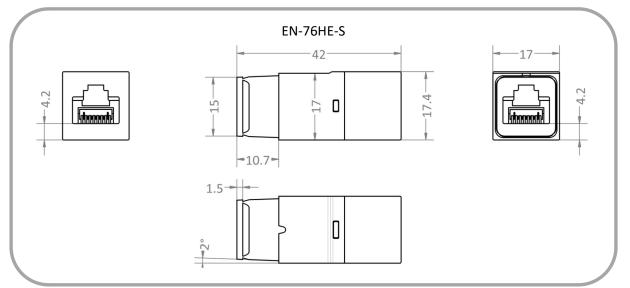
Figure 1 Technical drawings for EN-76HE-S. All dimensions are in millimetres.
